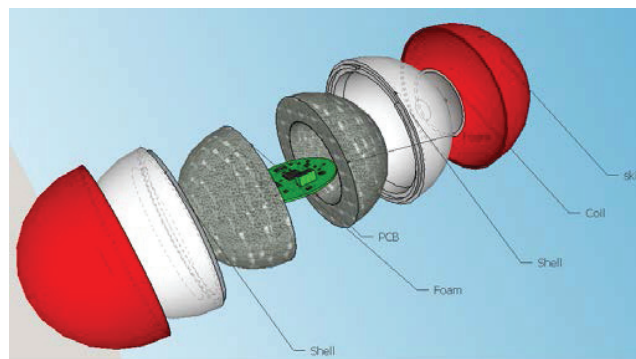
Exploded view of the RMIT Smart Cricket Ball
